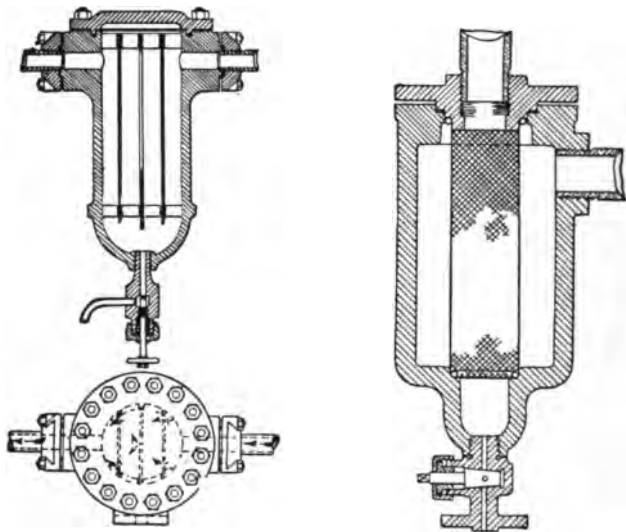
SEC. 1044.—Types of oil separators, refrigerator systems. (Courtesy Power Plant Engineering.)
